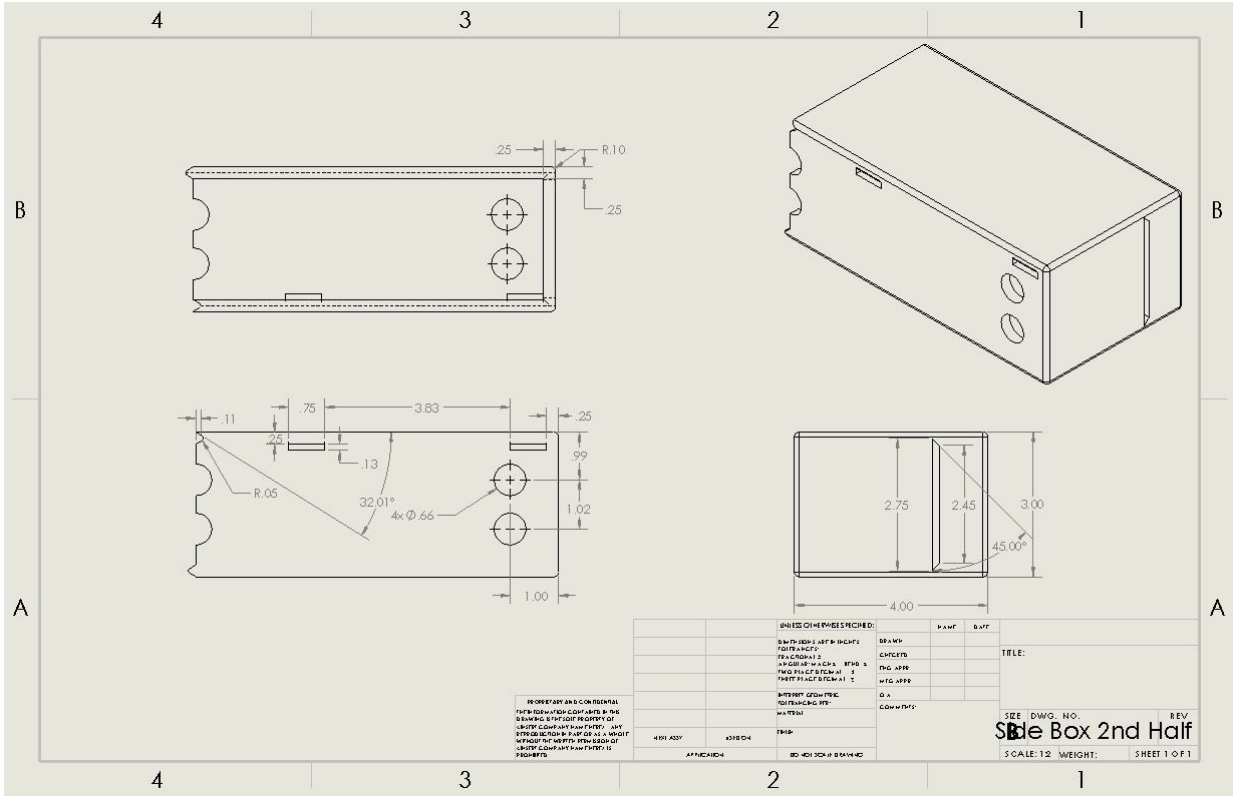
Detailed drawings of half of the side sensor housing for the final prototype.
